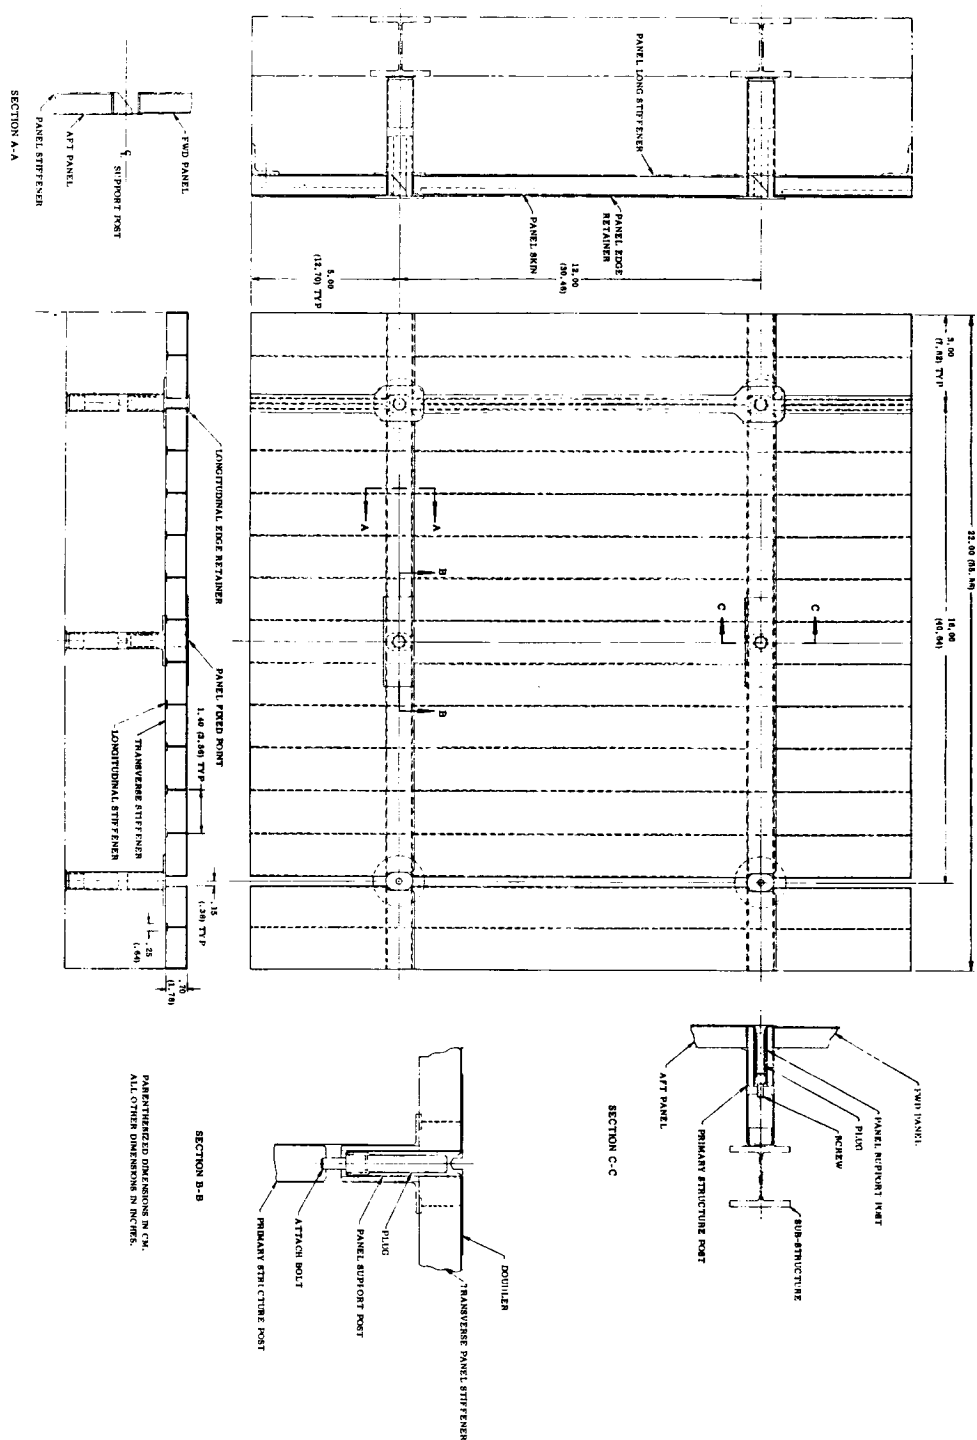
Preliminary Design of Tee-Stiffened Heat Shield Test Assembly (Sheet 1 of 2)
